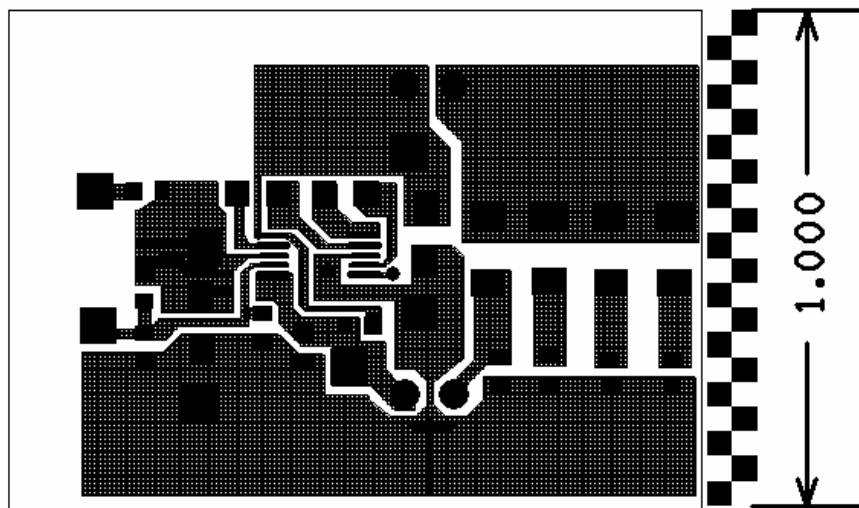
SP6682 PC LAYOUT TOP SIDE
